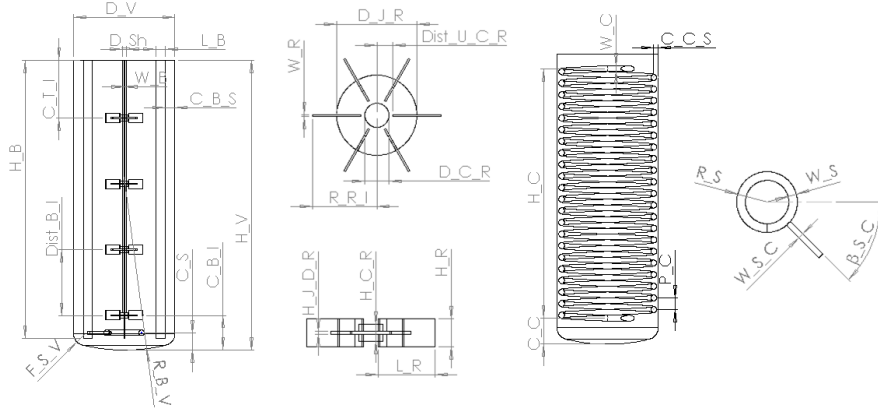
Rushton-tank bioreactor with helical cooling coil and O-ring sparger attached to the side walls. From left to right: General vessel geometry, top view Rushton impeller, front view Rushton impeller, front view helical cooling coil, top view sparger.
